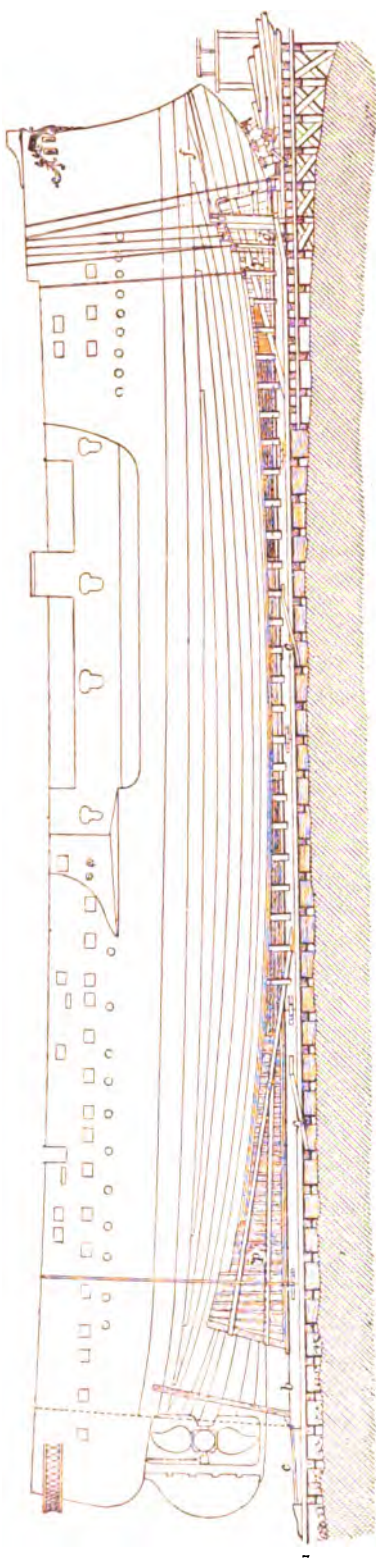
THE "KAISER" IN HER LAUNCHING CRADLE.
